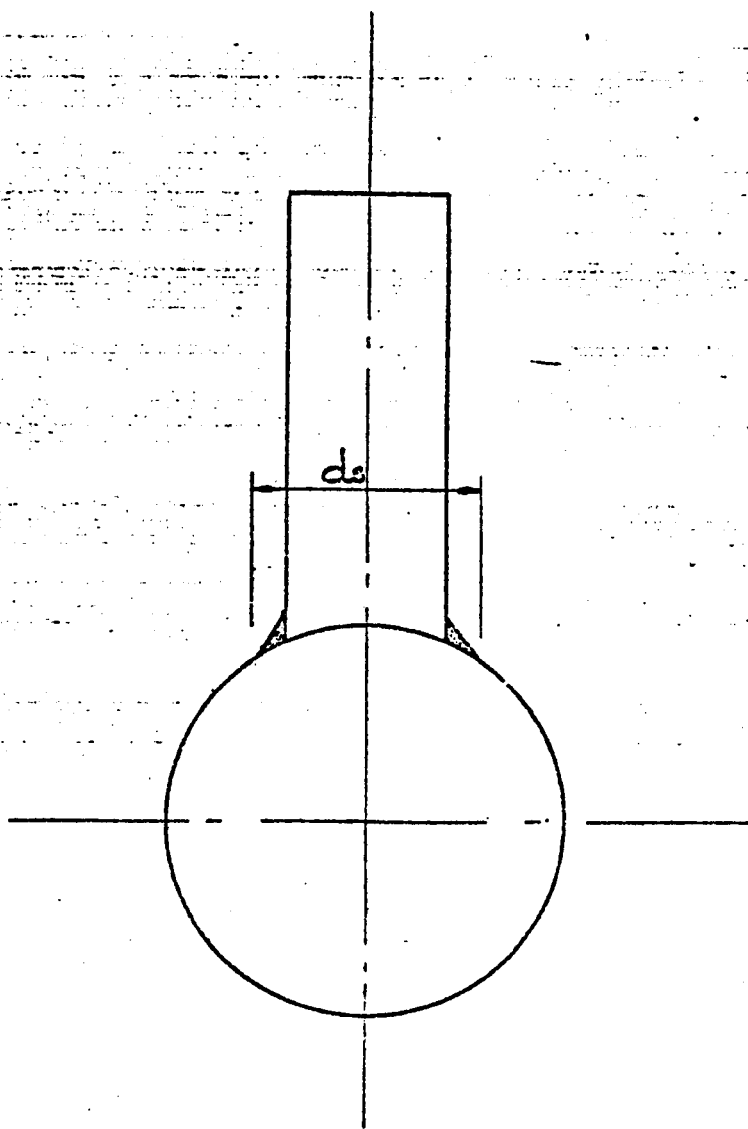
Section Showing Distance Between Toes of Welds, d_s .
